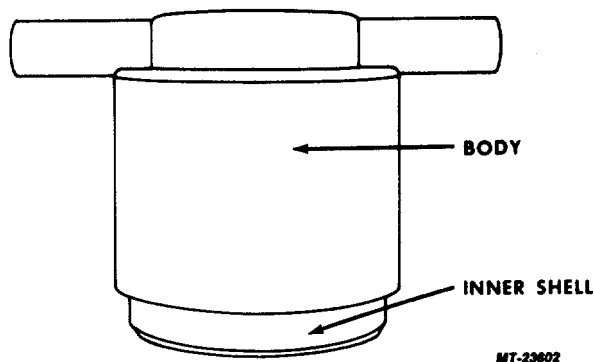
Air Cleaner Assembly (Replaceable Element Type)
